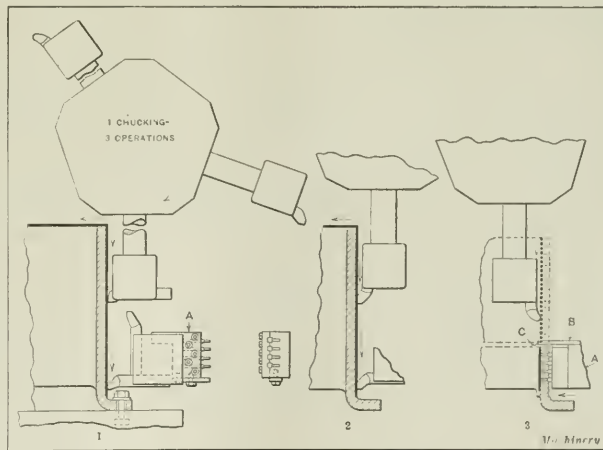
Tooling Arrangement in which the Piston-rings are cut off with Multiple Tools carried in a Special Holder in the Side-head Turret
